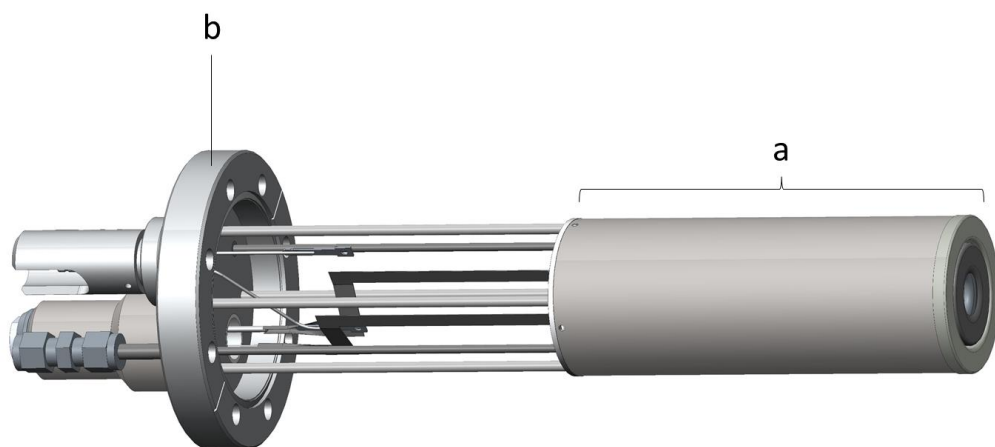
Standard-temperature effusion cell (LTEC) side view. Parts labelled described in Table 3.
